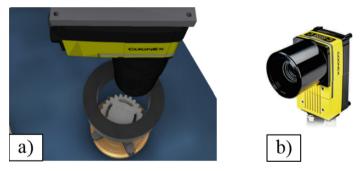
Gear wheel inspection - a) design of camera placement for gear wheel inspection b) Cognex In-sight D902M camera [13].
